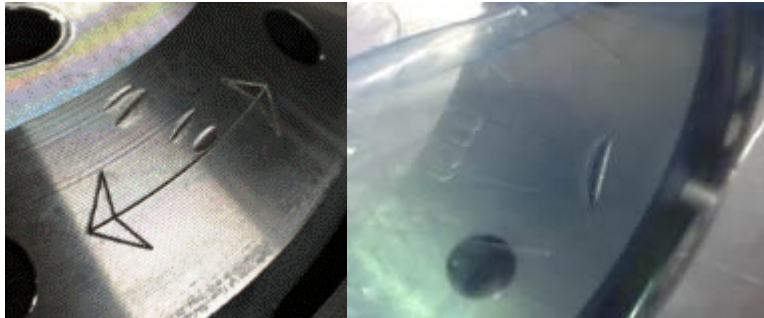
Example of disc brake with impact marks that should NOT be installed.
